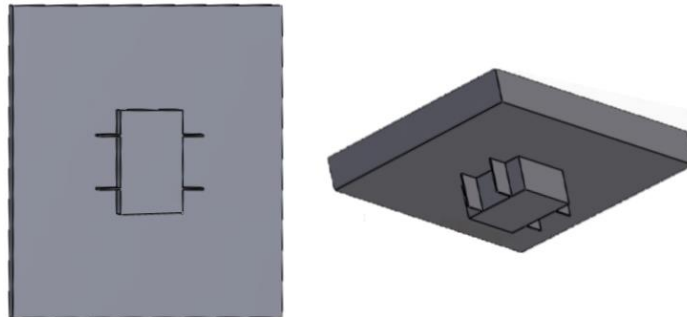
Top and side views of the designed 3D model in SolidWorks. We used a 3D printer to print the design and then washed and removed the residuals.
